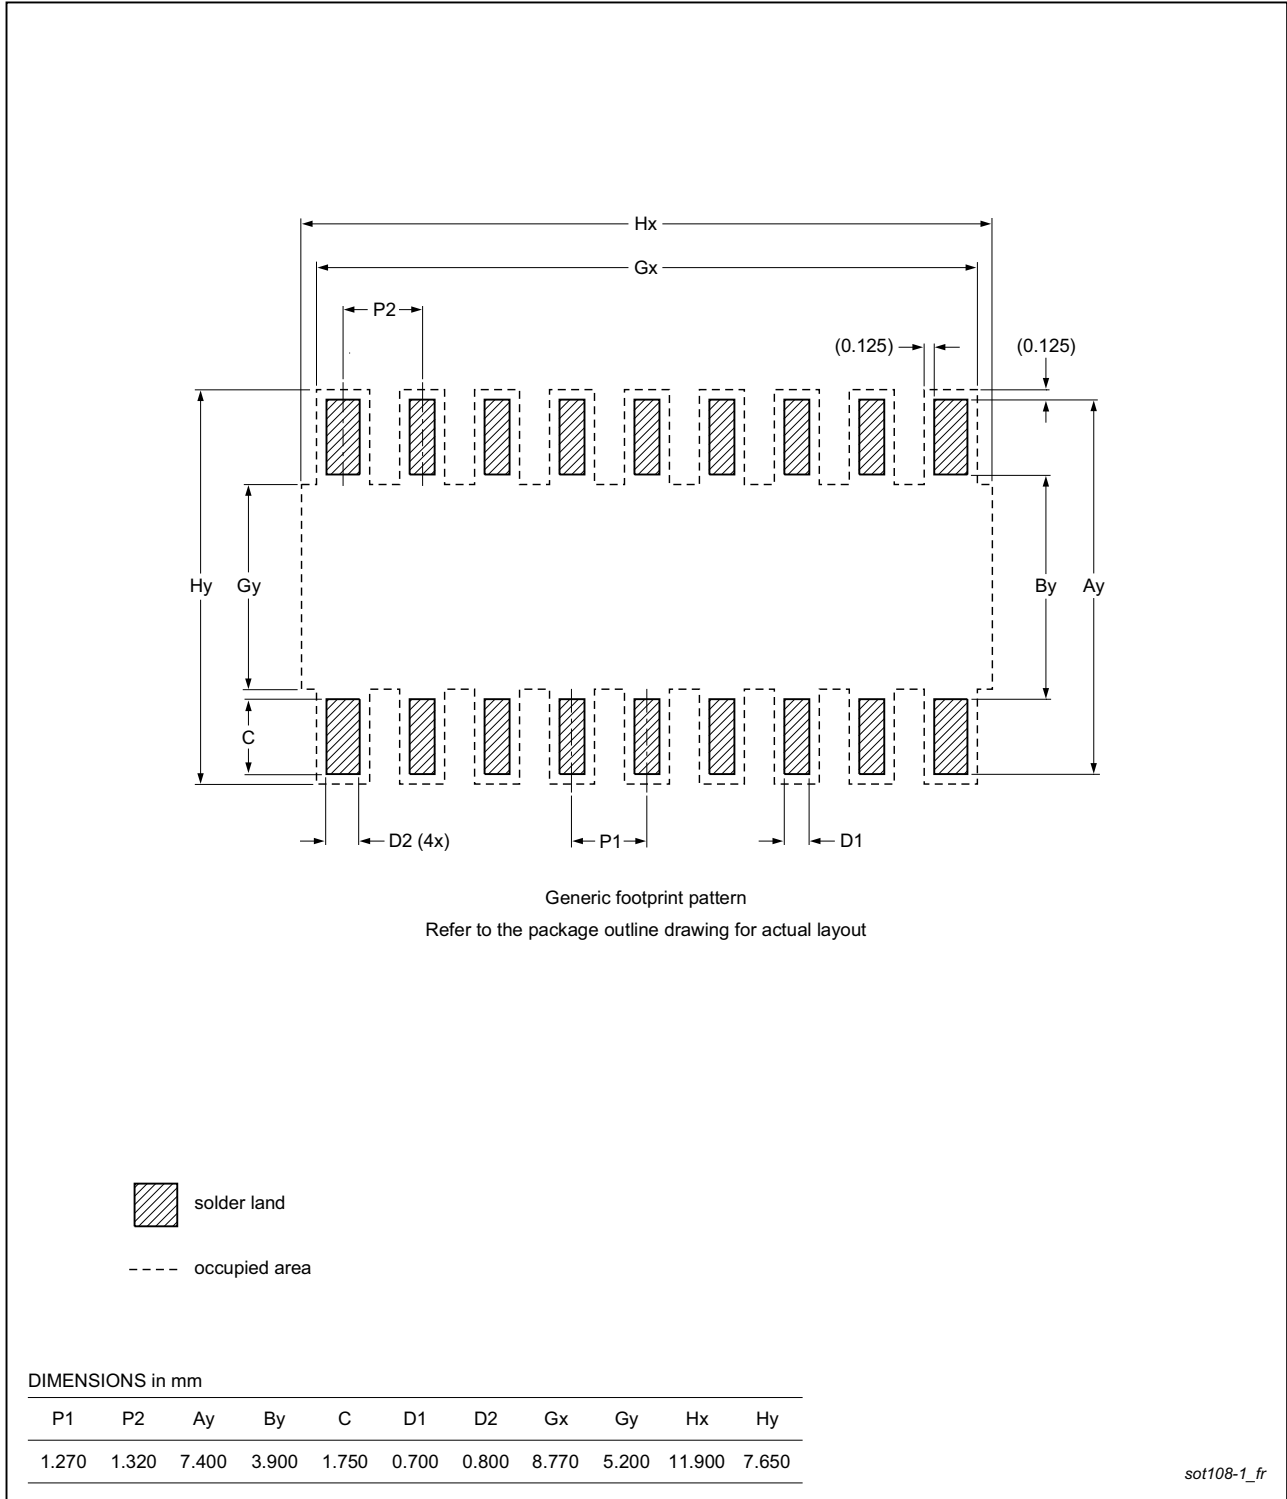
PCB footprint for SOT108-1 (SO14); reflow soldering
